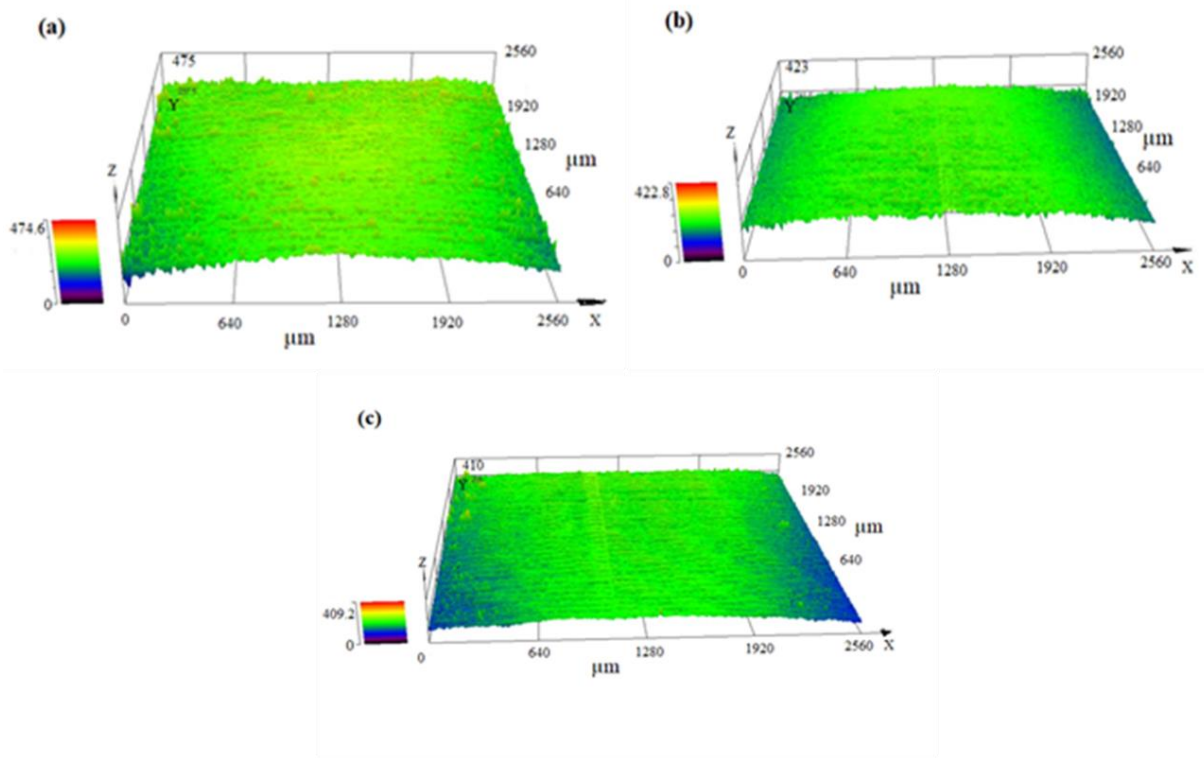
and 5.11 depict the confocal imaging of surface topography obtained under the normal insert machined surface and modified insert machined surface. At a low cutting velocity of 100 m/min, modified insert Design 2 cutting insert machined surface produced less peak intensity and uniform surface compared to normal insert machined surface and Design 1 insert machined surface, respectively. At the higher cutting velocity
